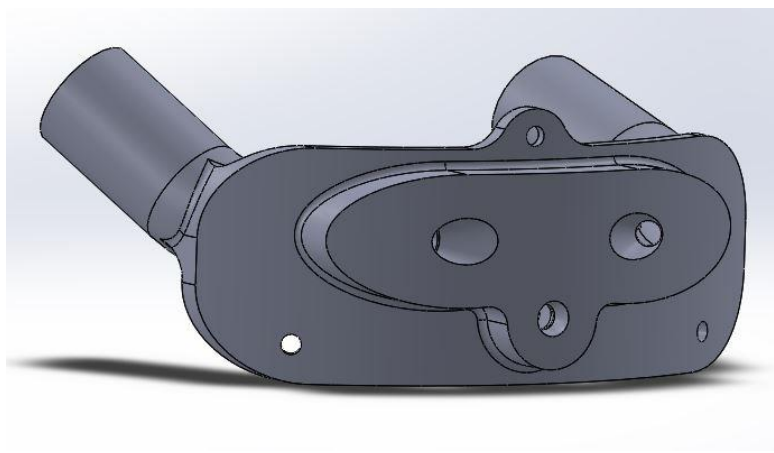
Roll axis scarfed geometry nozzles SolidWorks® CAD drawing.
